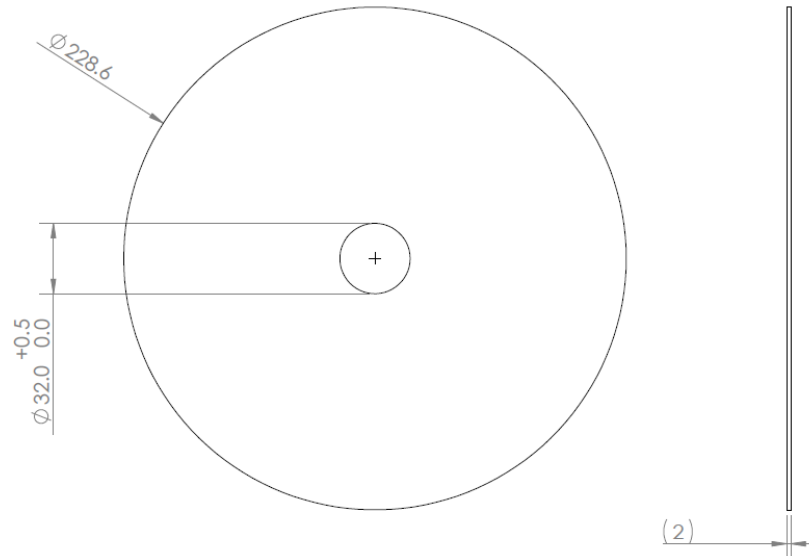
Carrier blank used in Marciniak and hybrid tests. The 32 mm diameter center hole edges are deburred and ground with 800 grit sandpaper.
